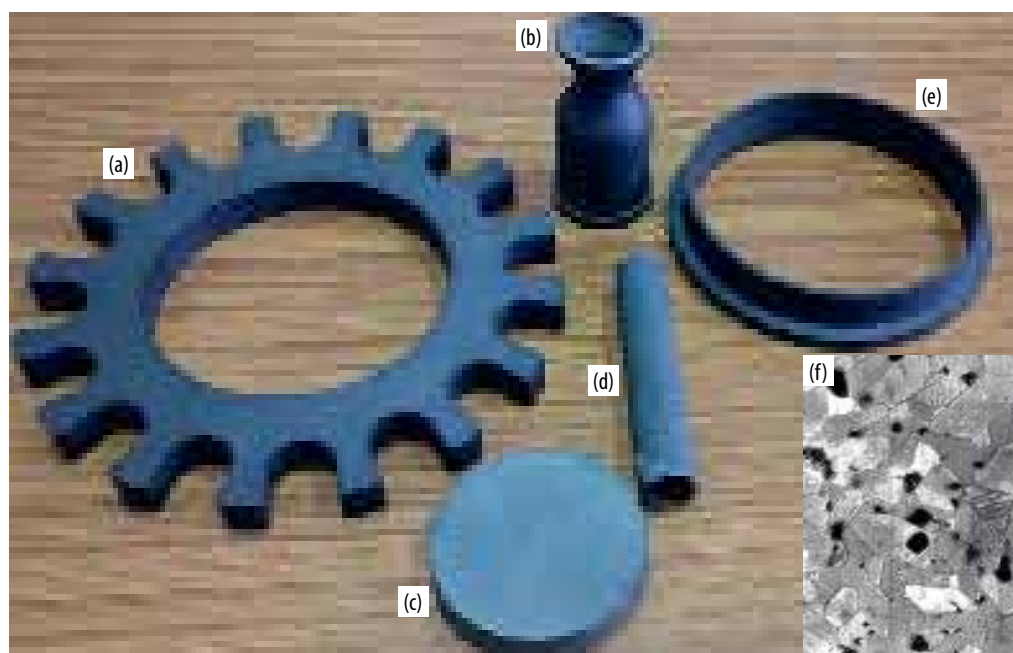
Pressure-less sintered SiC parts: (a) machined parts, (b) combustion liner, (c) disc, (d) tube, (e) wear resistant pump parts, and (f) SEM image of pressure-less sintered SiC
